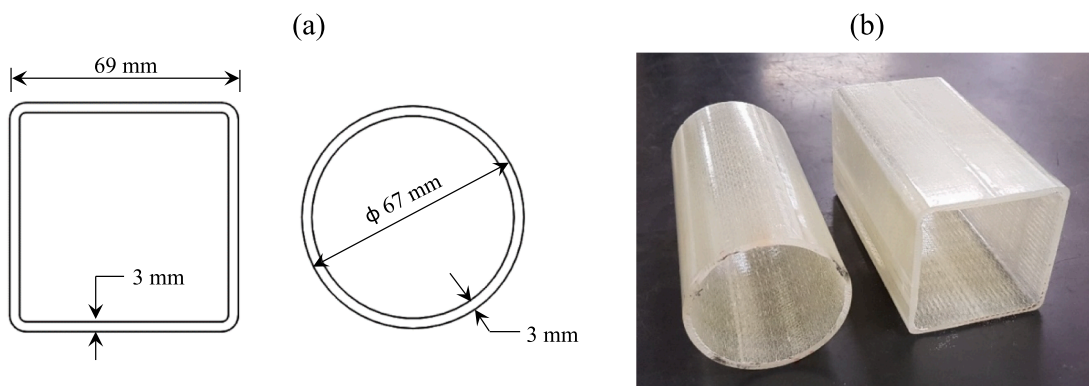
Fabricated CHS and SHS components; (a) cross sectional dimensions (b) 60 mm long components tested for SME.
